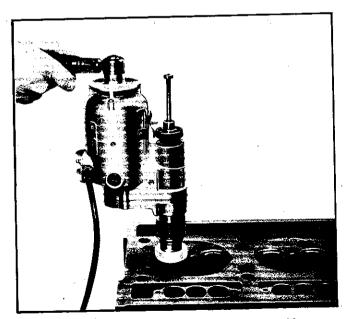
Grinding Hardened Valve Seats with Tool KMO-167-D.
